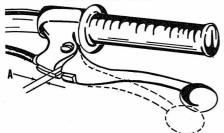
Clutch cable adjusters should be turned to obtain 5/32 inch free play at
